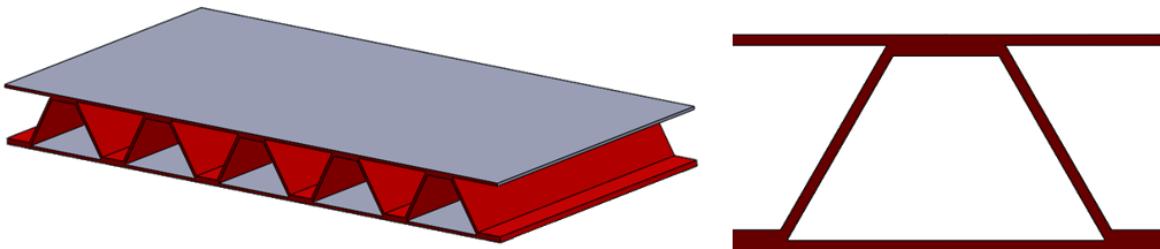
Profile view and cross-section of a NavTruss sandwich structure.
